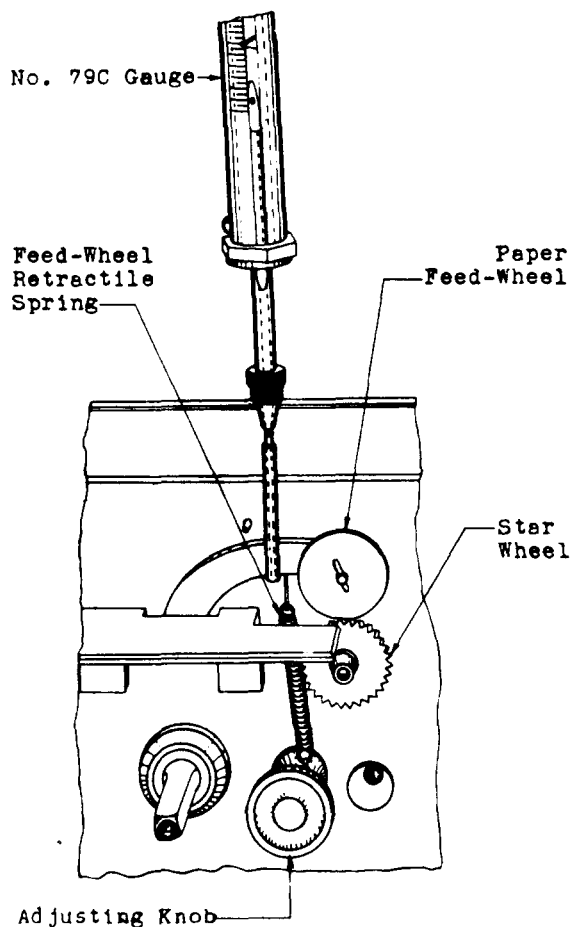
Method of Checking Paper Feed-Wheel Pressure
